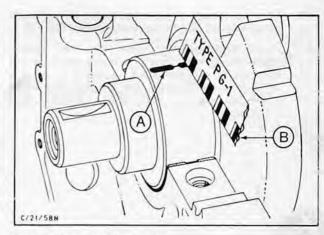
Measuring bearing play A – Compressed plastic thread B – Measurement scale
